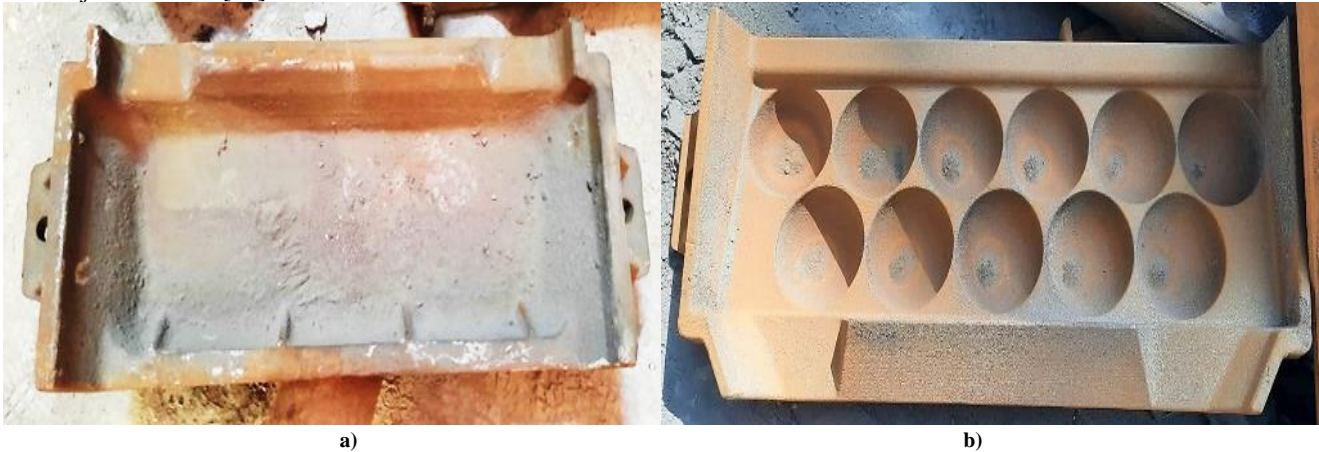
Types of casting moulds: a) flat; b) hemispherical
